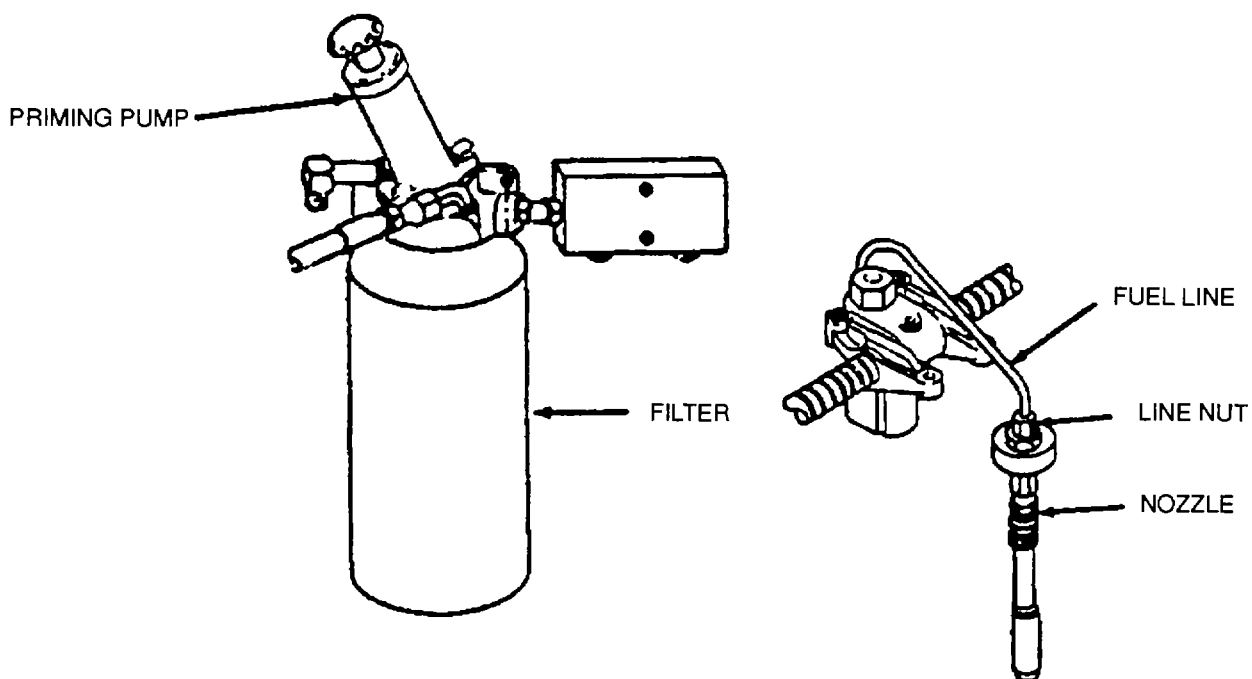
HP Pump Diesel Engine Fuel System Bleeding
